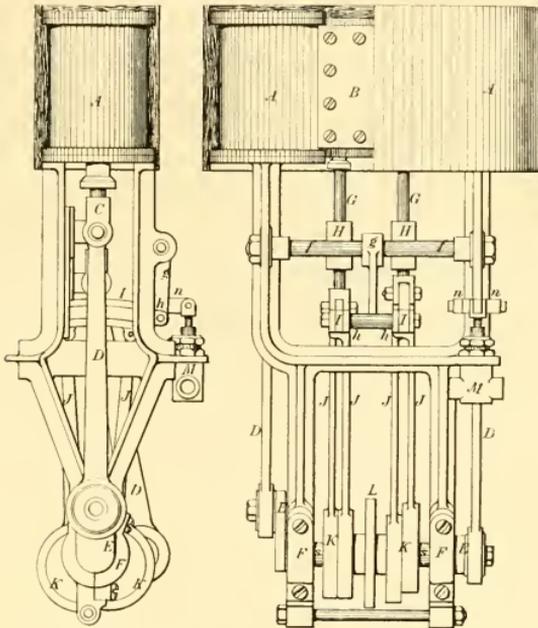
ENGINE OF CARRIAGE SHOWN IN FIG. 14.
